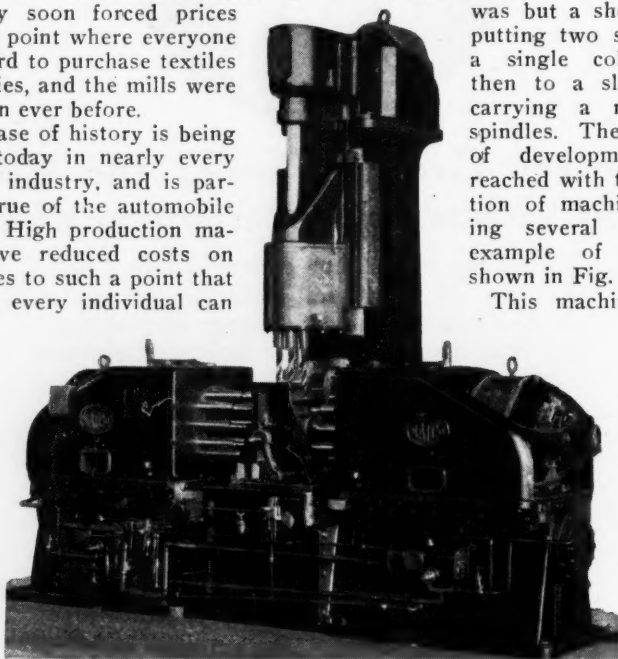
This machine drills 26 holes in the sides and top of a tractor rear axle housing.
